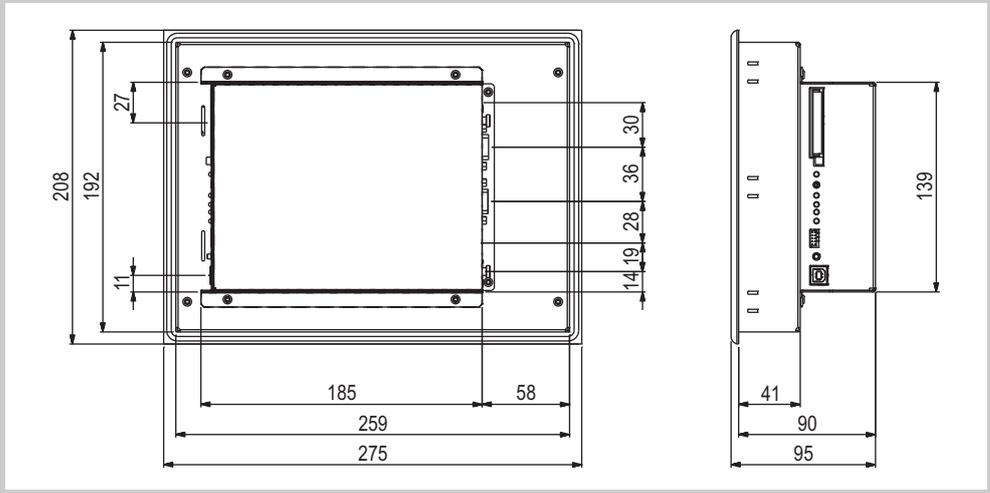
Mechanical dimensions of the 8.4" devices in mm
